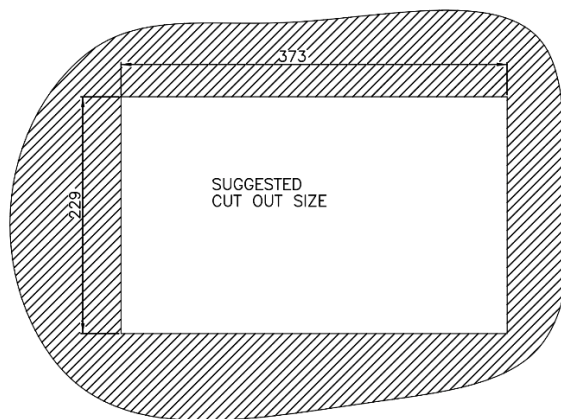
DM2-W156K(L) Cutout Dimensions (Unit: mm)
